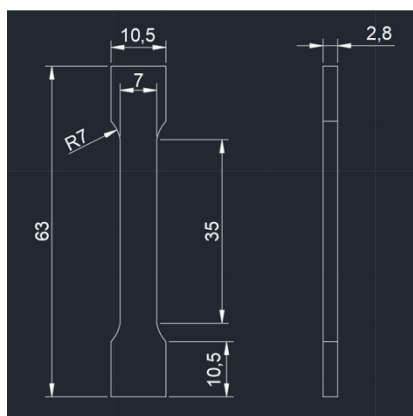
Dimensioned (in millimeters) design of the shape in AutoCAD 2023 software.
